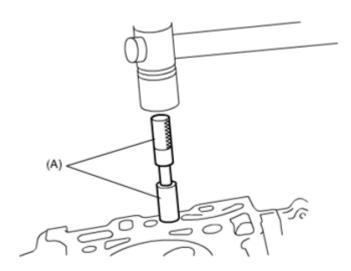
Tapping Oil Relief Valve To Cylinder Head
